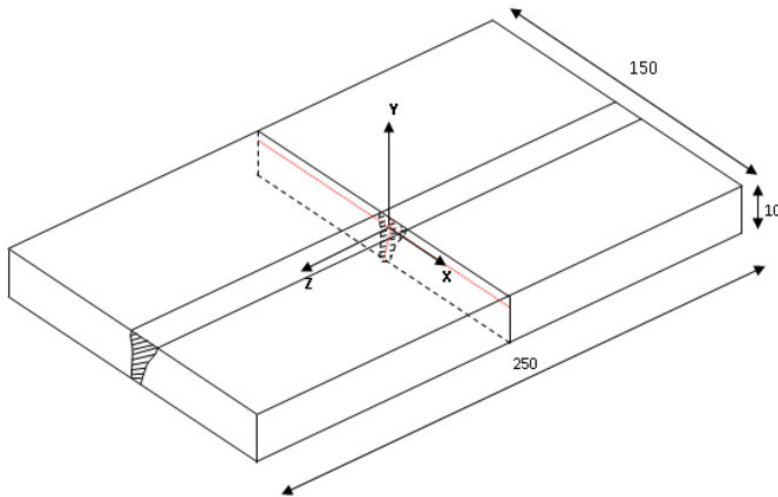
Electron beam welded P91 plate and the cross-section of the model
